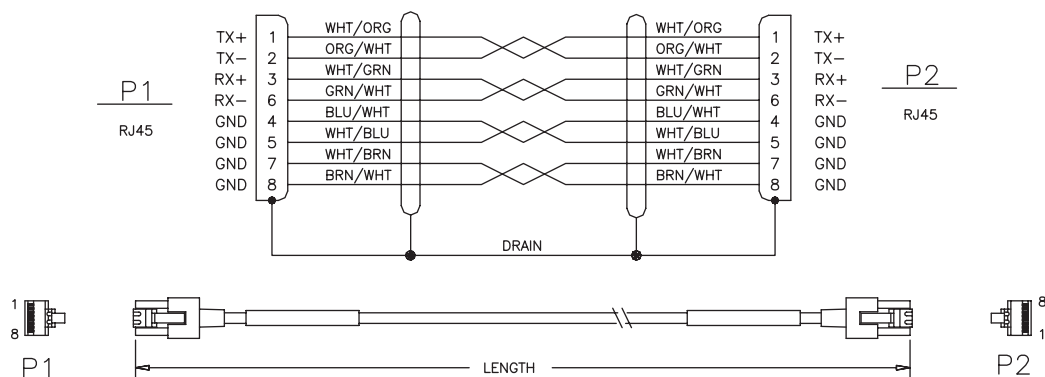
Crossover (CAT-5) Cable P/N 830-0723-xx
